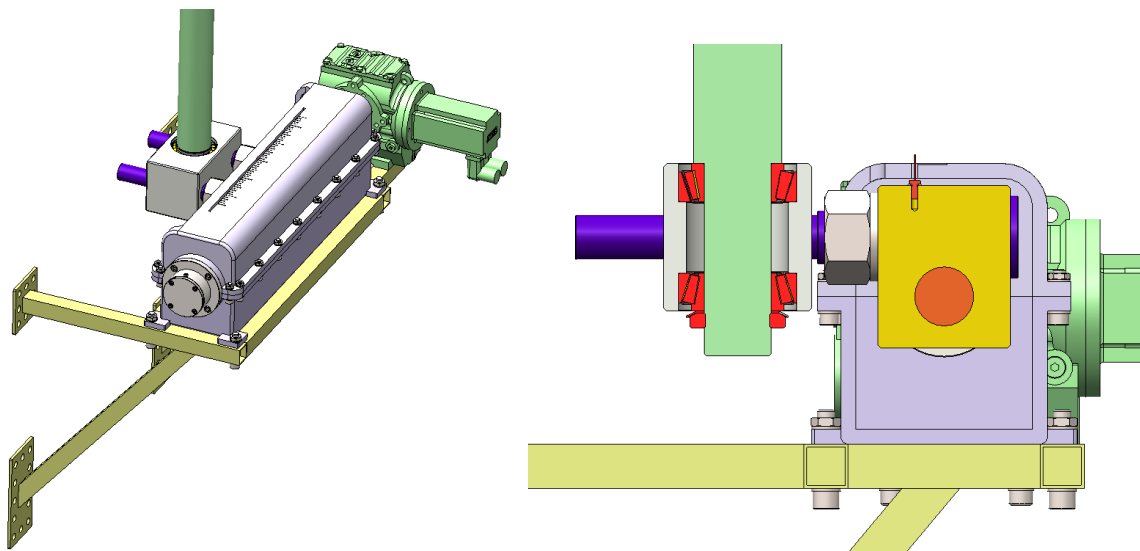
Helical-worm servo gearmotor with kinematic mechanism
